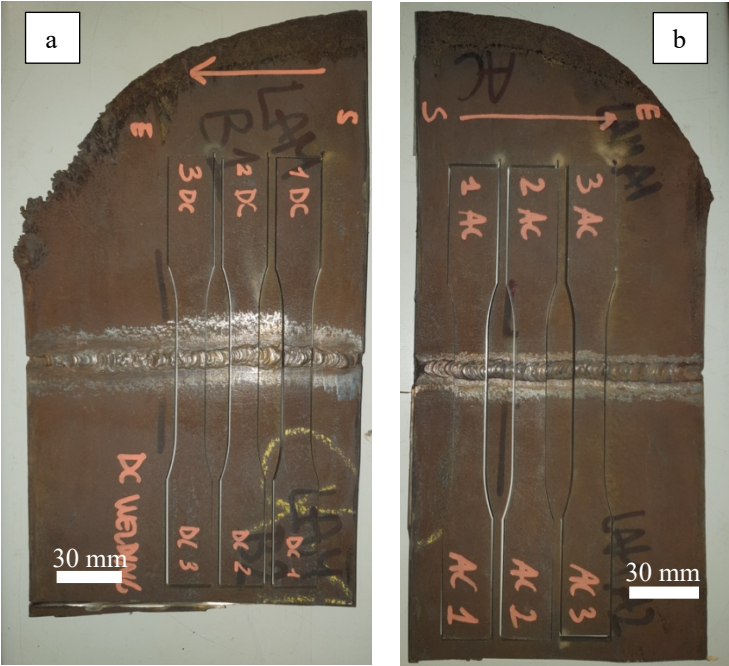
Tensile specimens cutted from the welded plates: a) Direct Current; b) Alternate Current
